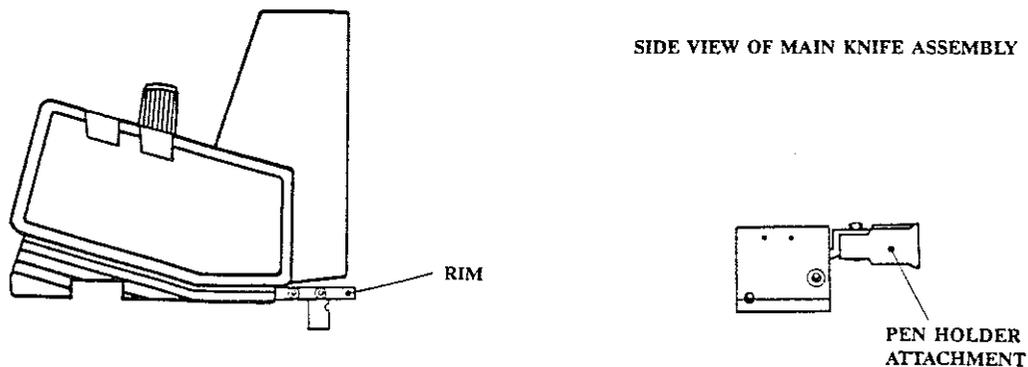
ATTACHING THE PEN HOLDER TO THE KNIFE ASSEMBLY
